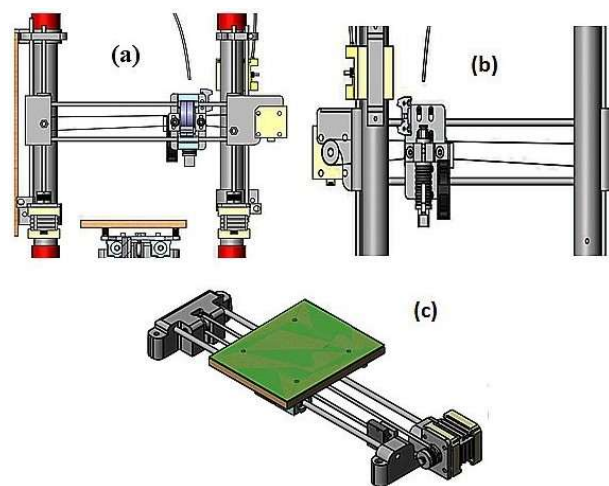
Using CAD to model parts and components of a printing machine [14]
